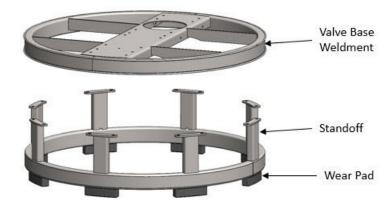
Valve Base Weldment, Standoff, and Wear Pads
